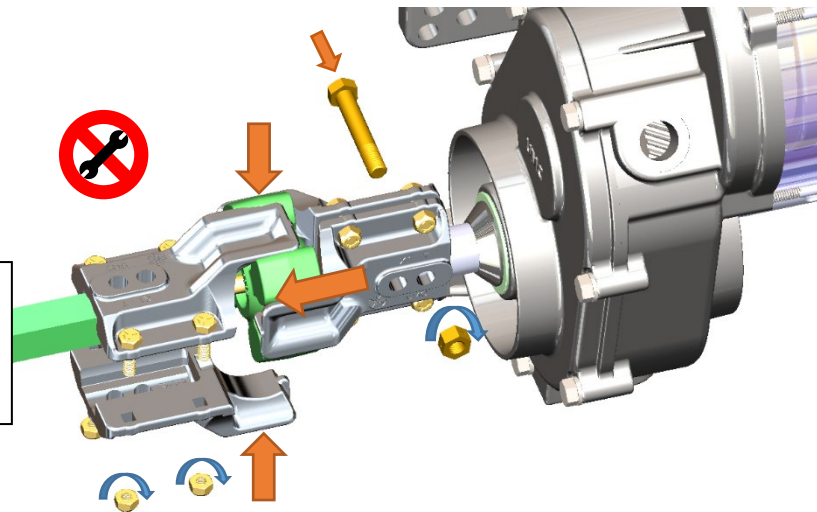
install the couplers onto the drive shaft. Push the coupler on the motor's shaft towards the drive shaft until puck and coupler arm are fully engaged, check to make sure that alignment rod is fully seated inside both couplers.
